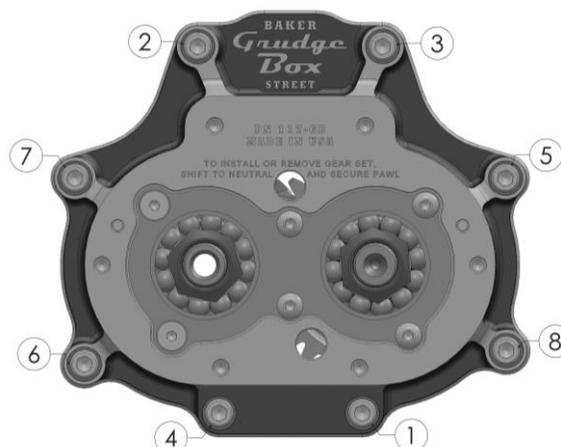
| TORQUE SEQUENCE FOR GRUDGEBOX BEARING DOOR BOLTS
